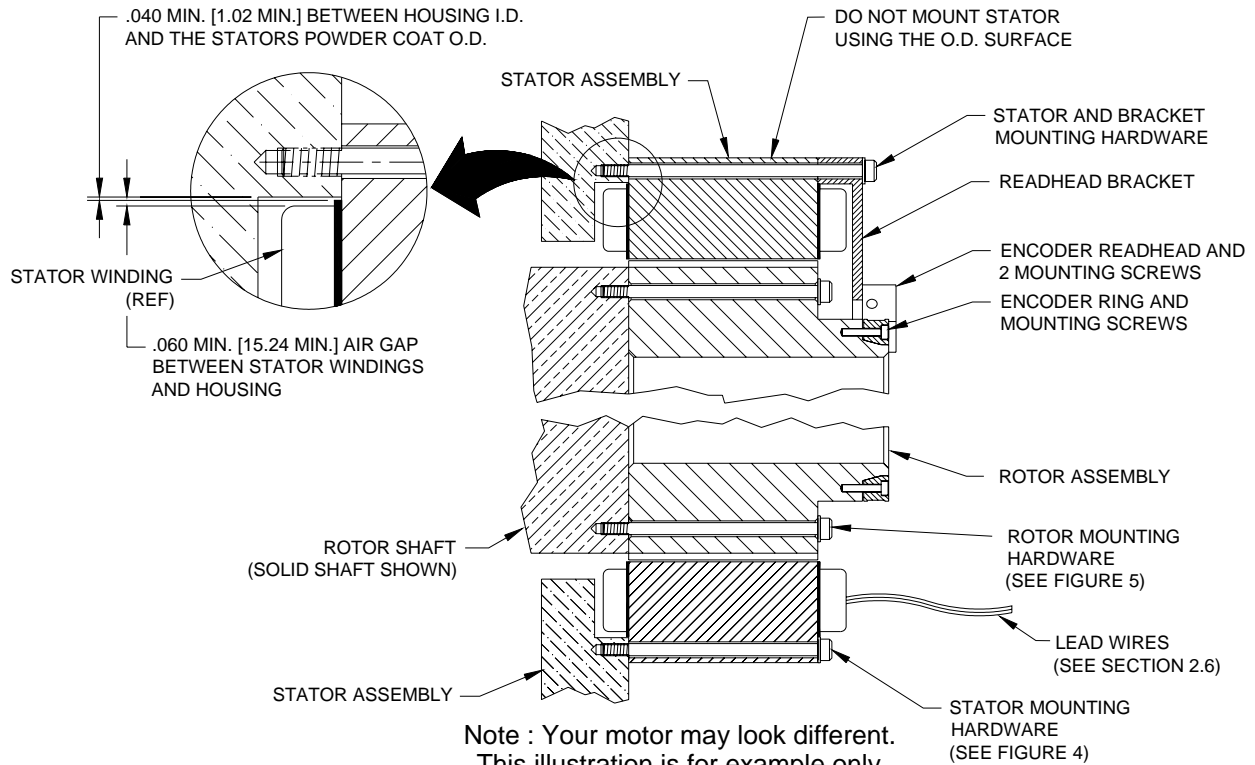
, Mounting Configuration with Encoder Readhead and Ring
